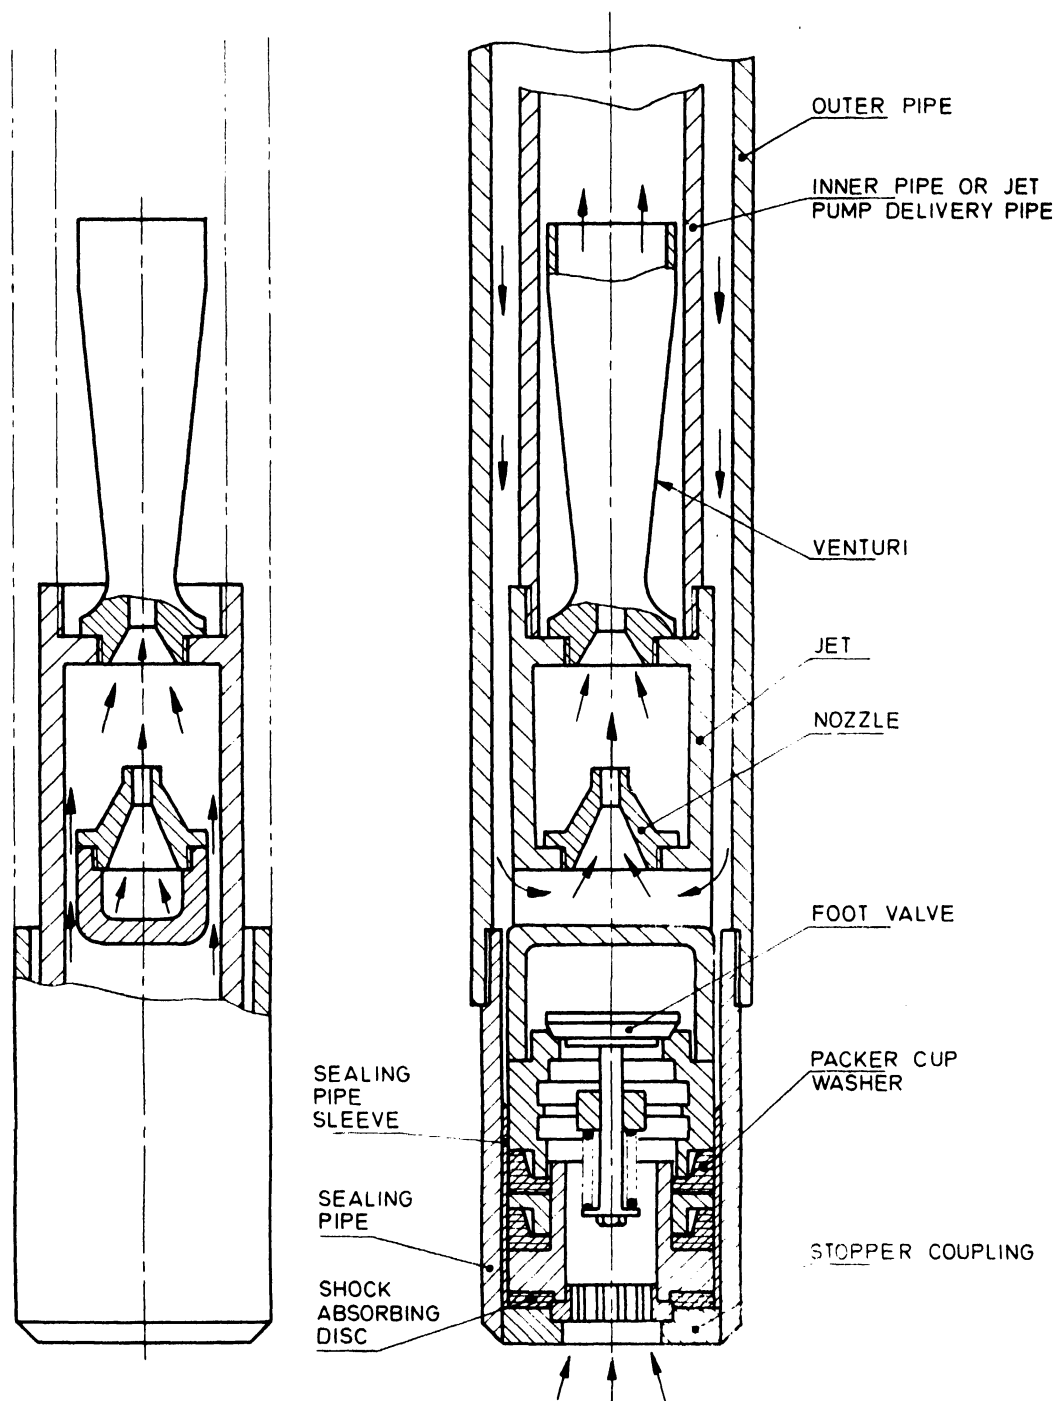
A SECTION THROUGH A PACKER TYPE JET PUMP ASSEMBLY
